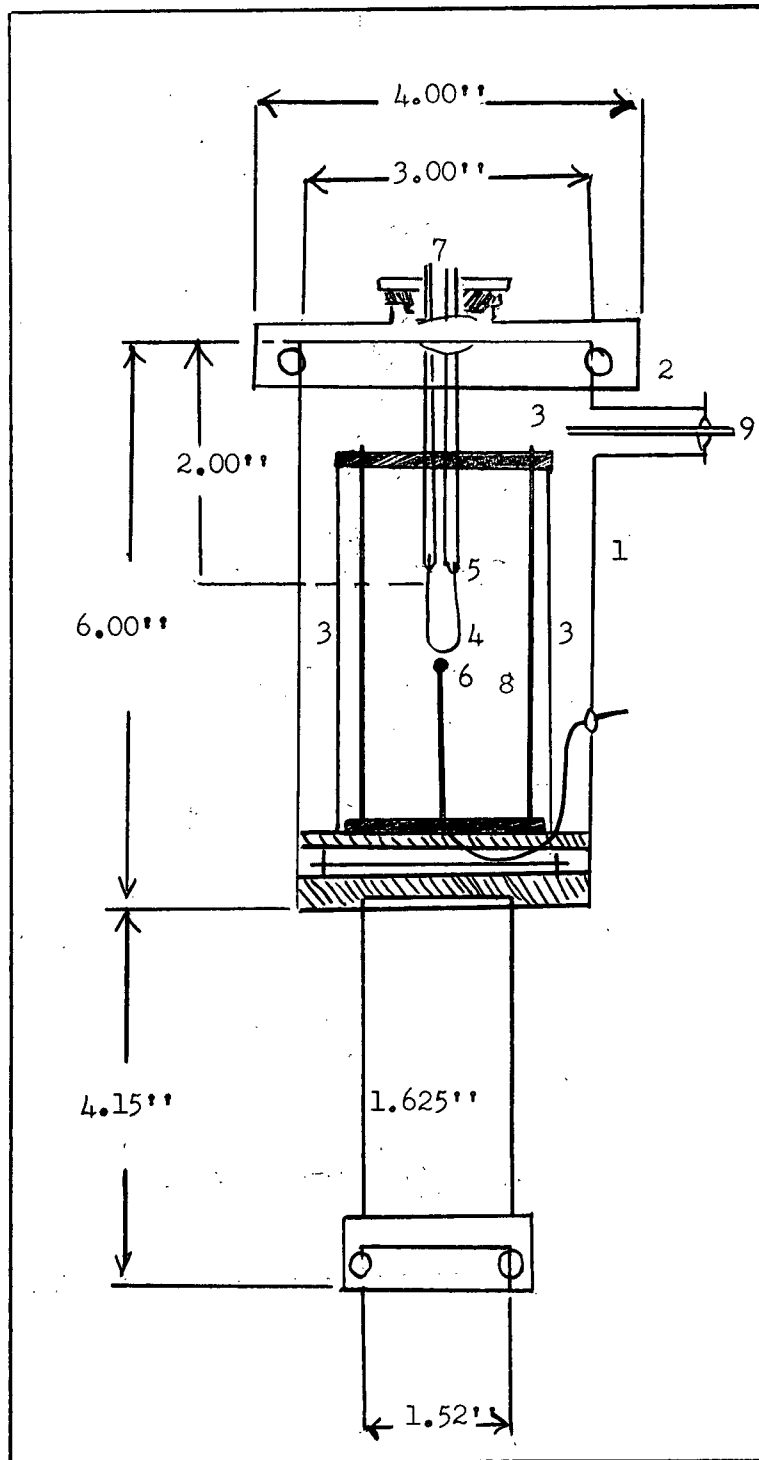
Diagram of Furnace and Vacuum Chamber Assembly
